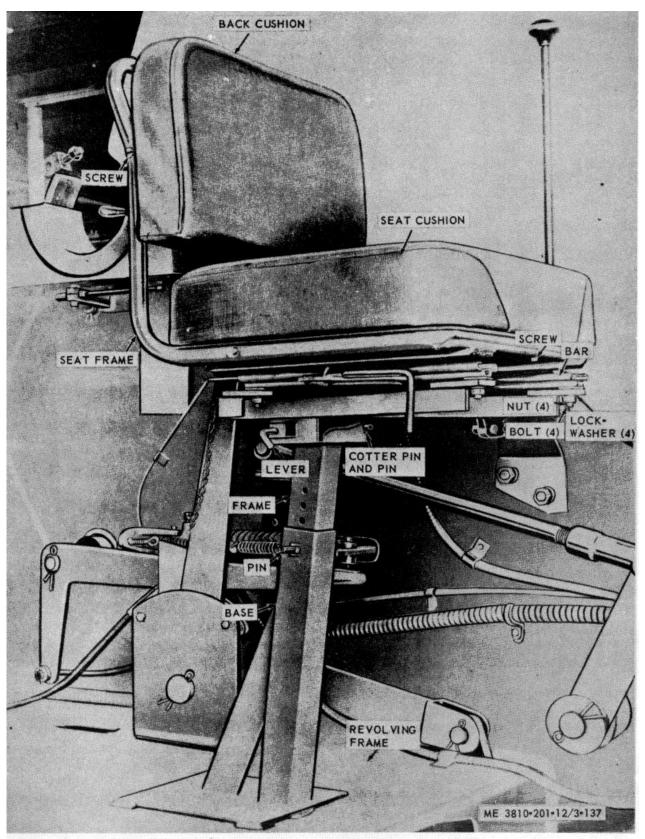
Operator's seat, removal and installation (Model 855BG-2).
